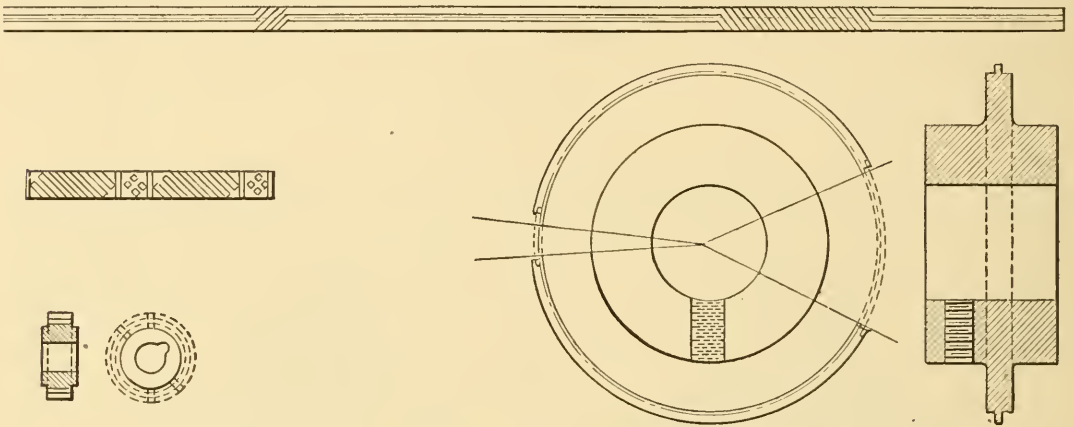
LAYOUT OF A PAIR OF INTERMITTENT SPIRAL GEARS.
